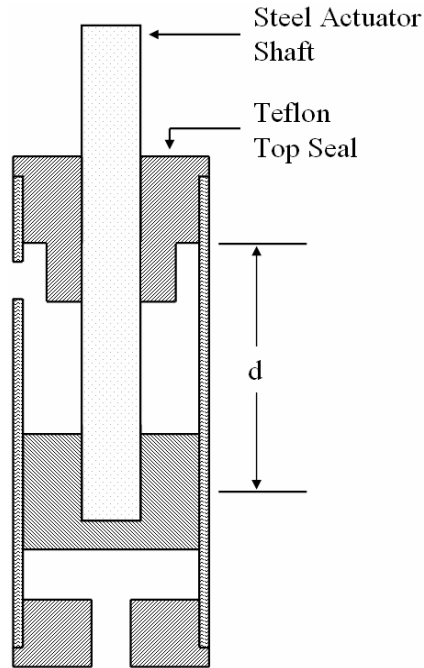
Schematic of piston showing steel actuator shaft, Teflon top seal, and piston depth d .
